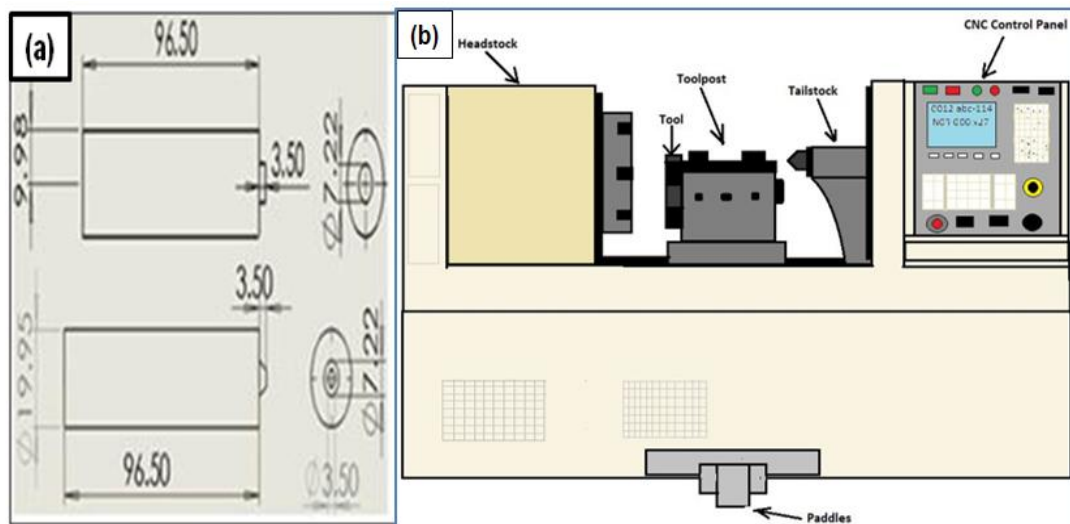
(a) Dimension of tool probe (b) CNC lathe machine set up
